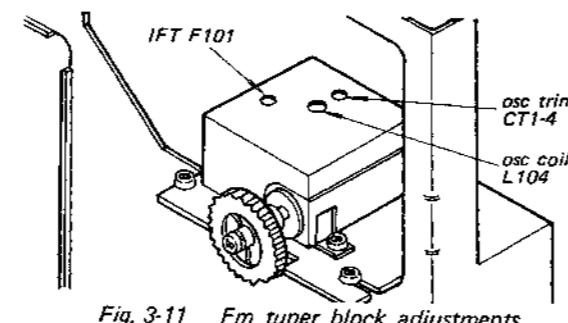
Fm tuner block adjustments on fm tuner block
